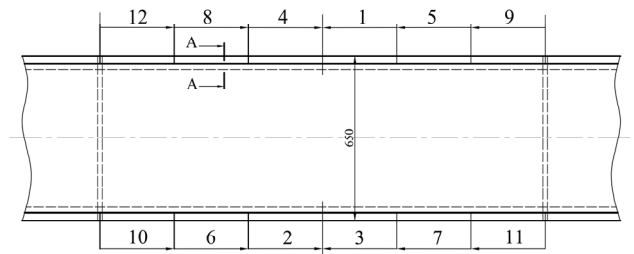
Welding plan of vertical sheets for lamella of segment II
